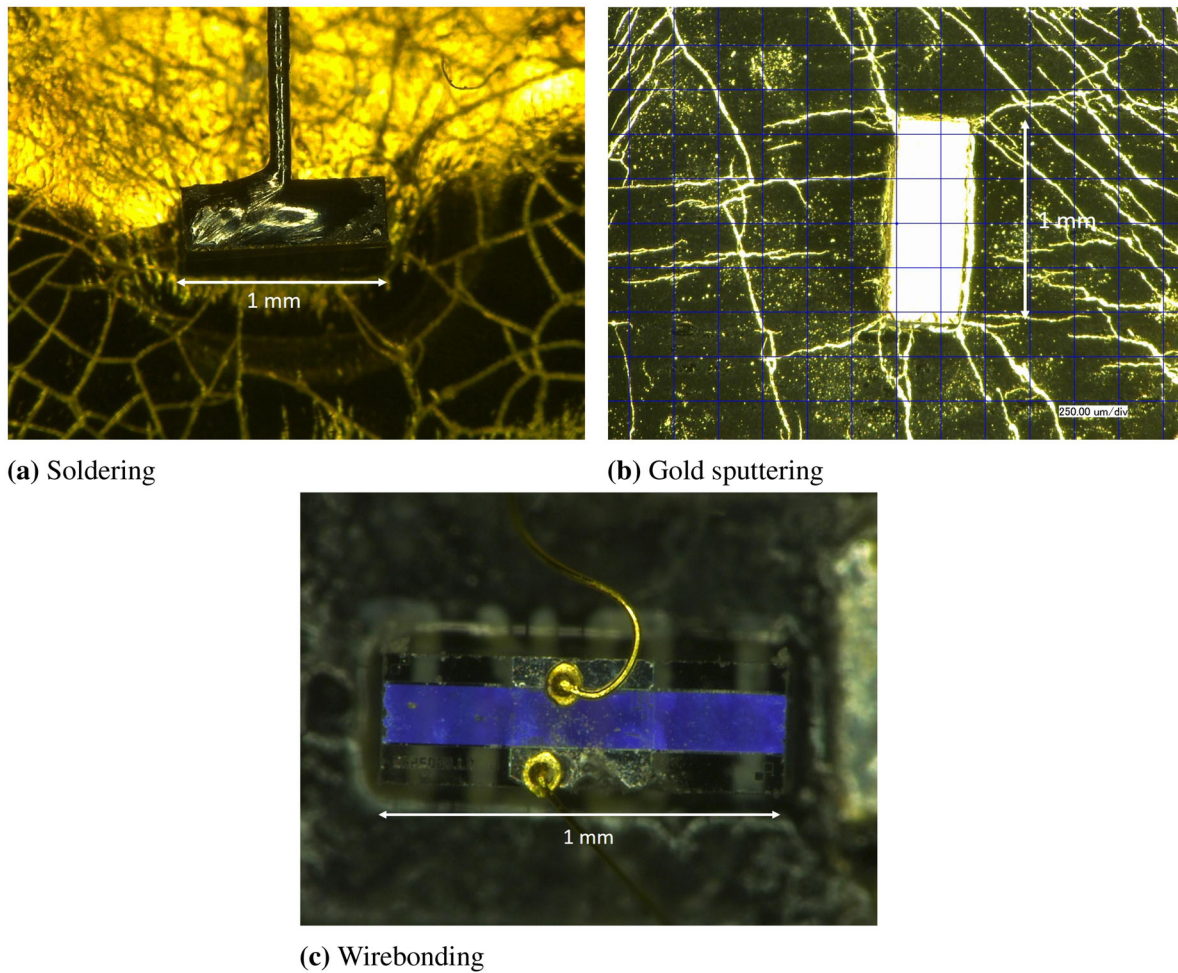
Manufacturing of the heating resistive layer and electrical contacting of the chip. Soldering (a) 100 μm diameter aluminum wire on the gold layer at the bottom of the chip, sputtering of the gold layer at the bottom of the chip (b) and wirebonding 25 μm gold wire on aluminum pad (c).
